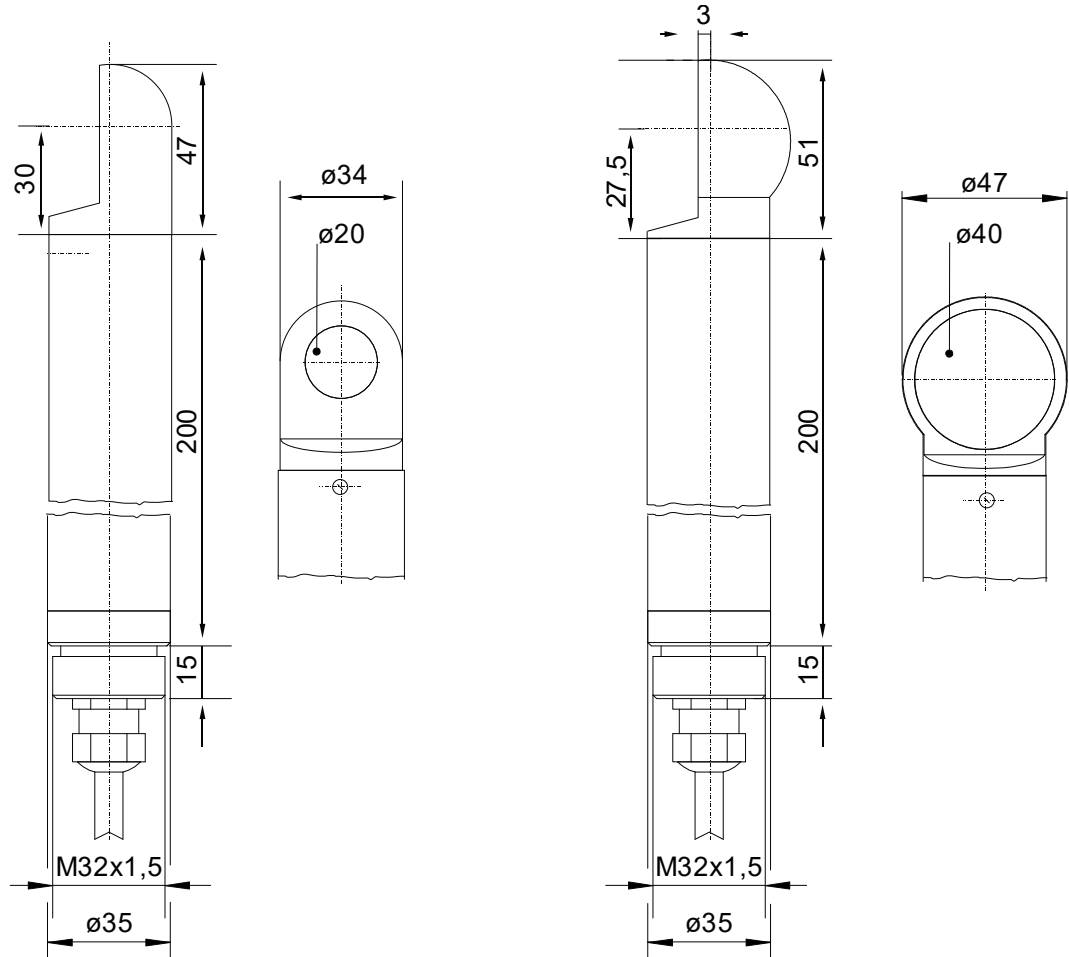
Dimensions rod sensor type NOS $\varnothing 20/40$ mm
